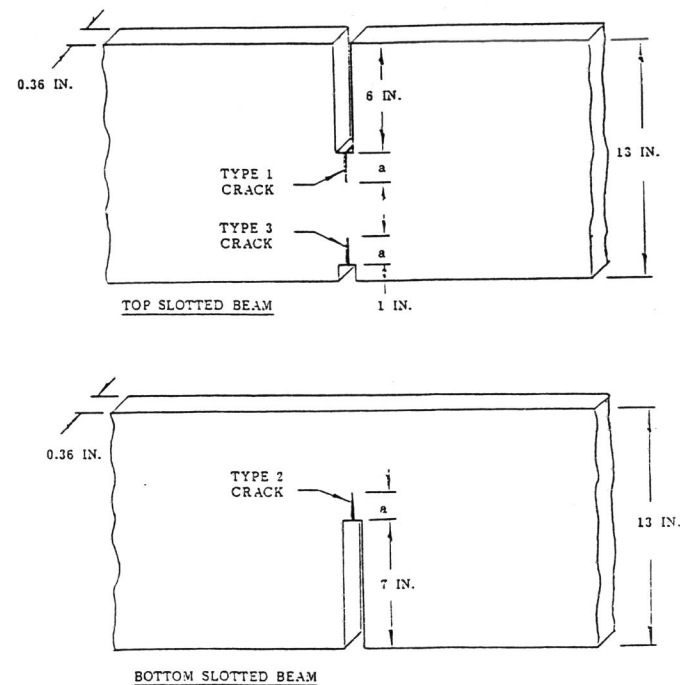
Top Guide Beam Crack Types and Locations
